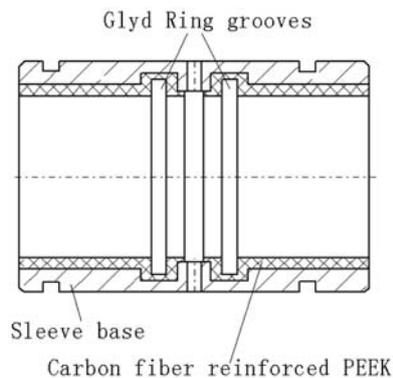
Cross-sectional view of sleeve with CFRP liner
